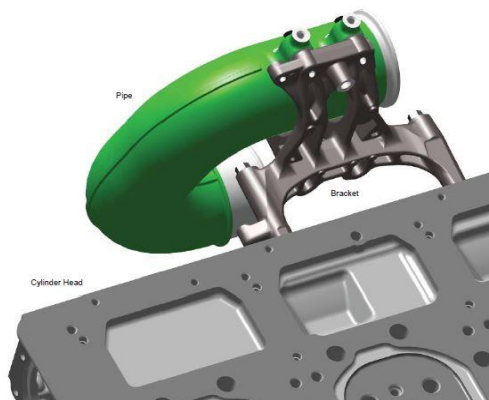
Components in Sub-Assembly Pipe, Bracket and Cylinder head.
